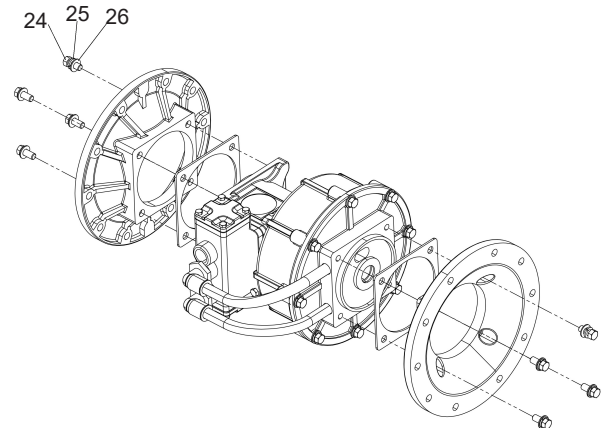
Disassembly of air chamber 内腔体拆卸
